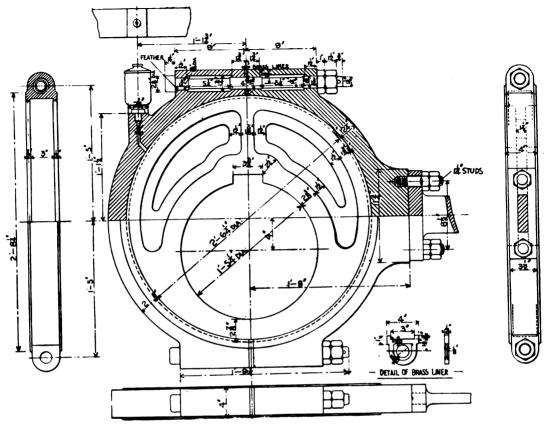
to 362.—Hylton Winding Engines—Tail Piston Rod Guide Bar (see page 170).
